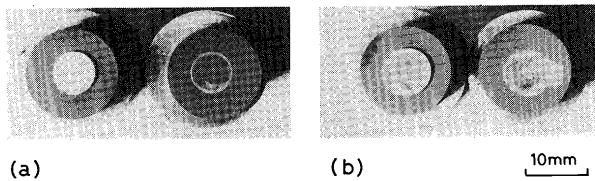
Fractured surface of bonded joints, (a); fractured at interface and (b); fractured in Si_3N_4 .
